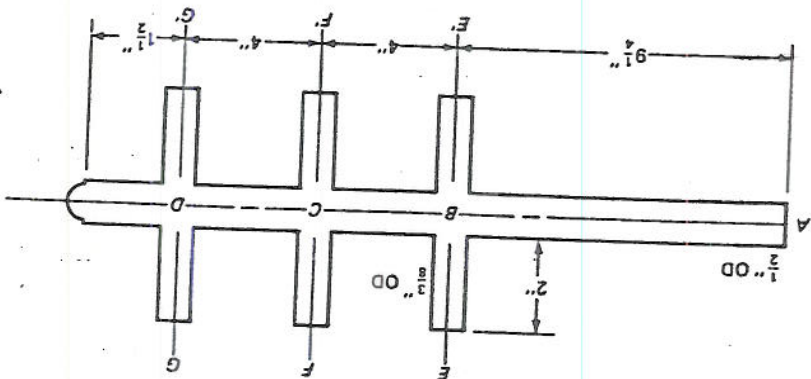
Sprue-runner system for a six-cavity telephone-handle molding die.
